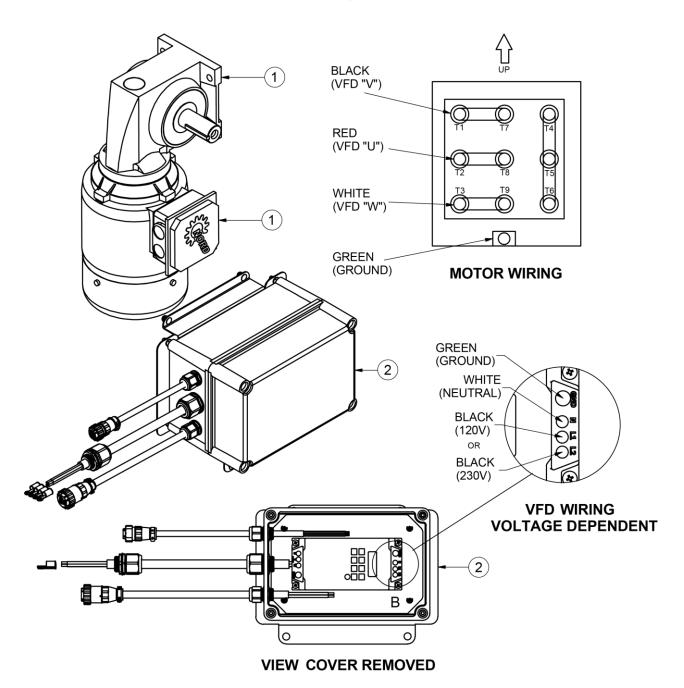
Drive, Motor Wiring, 3-Phase, 230V/460V, 50 Hz/60 Hz
